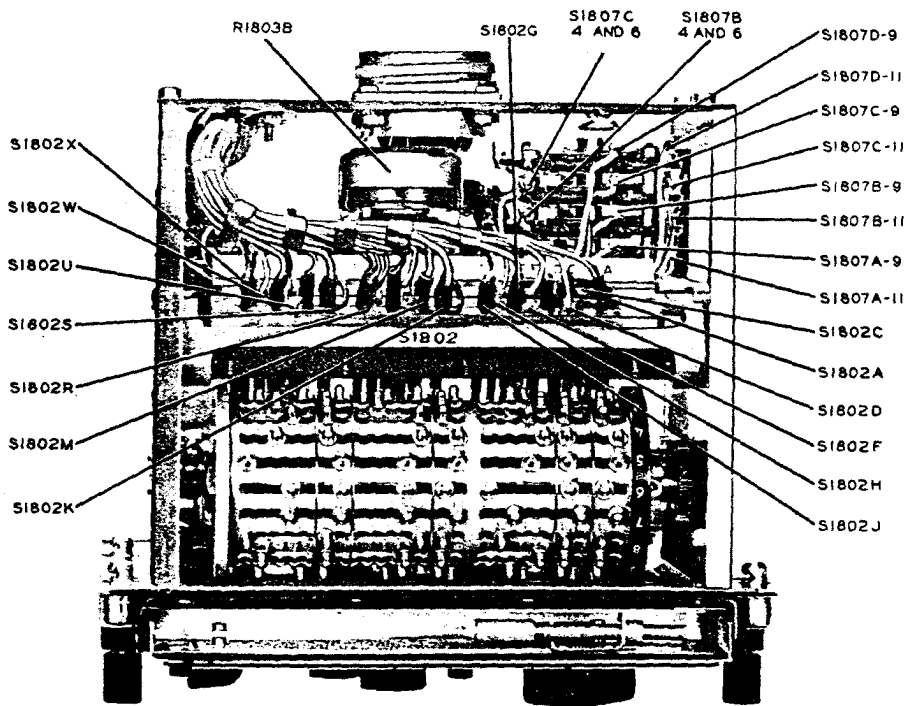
Radio Set Control C-1607/ARC-52, Bottom View, Cover Removed
